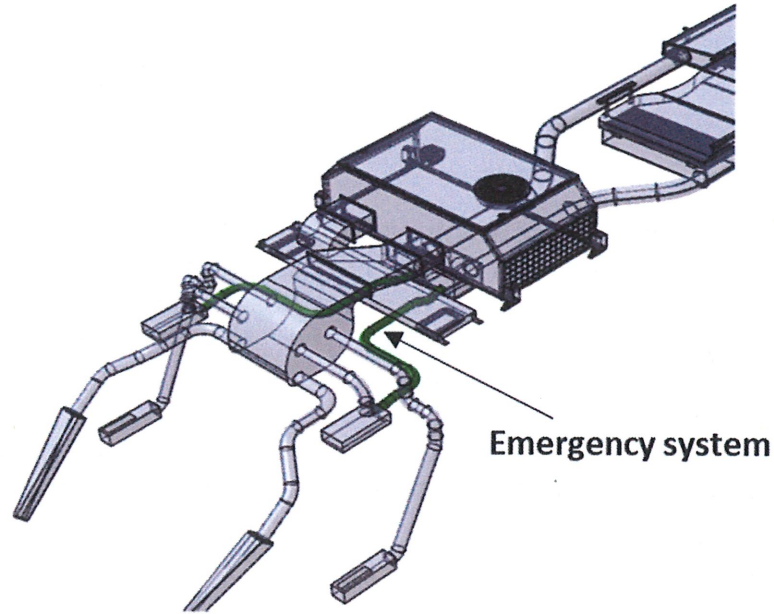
Emergency duct system – TBD - for descriptive purposes only
